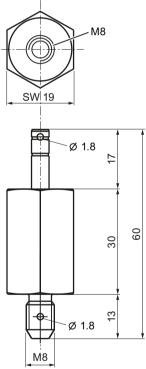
Dimension drawing of quick change holder 6GT2690-0AH00
